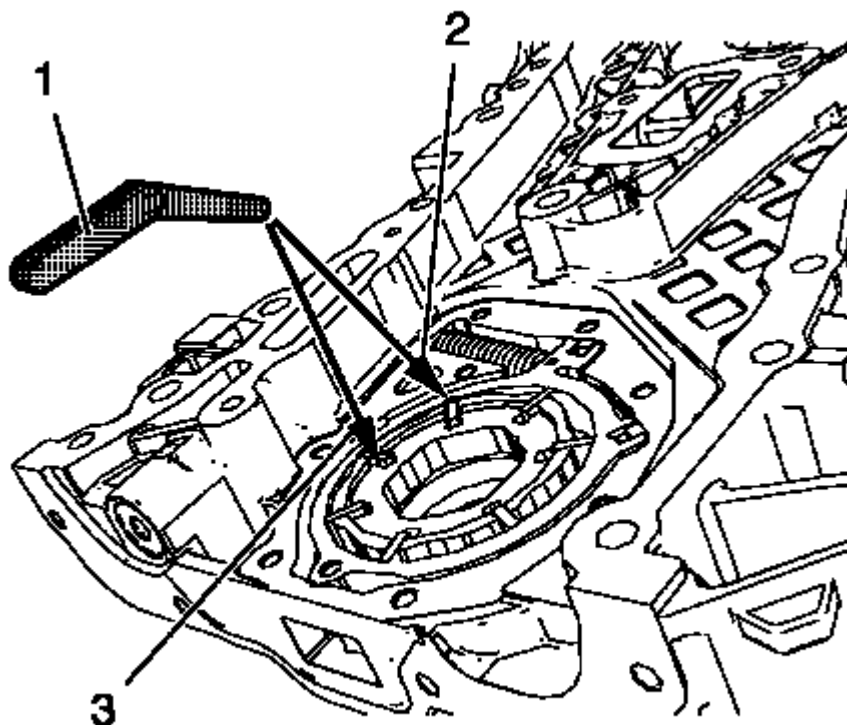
Feeler Gauge, Oil Pump Slide And Oil Pump Vane
